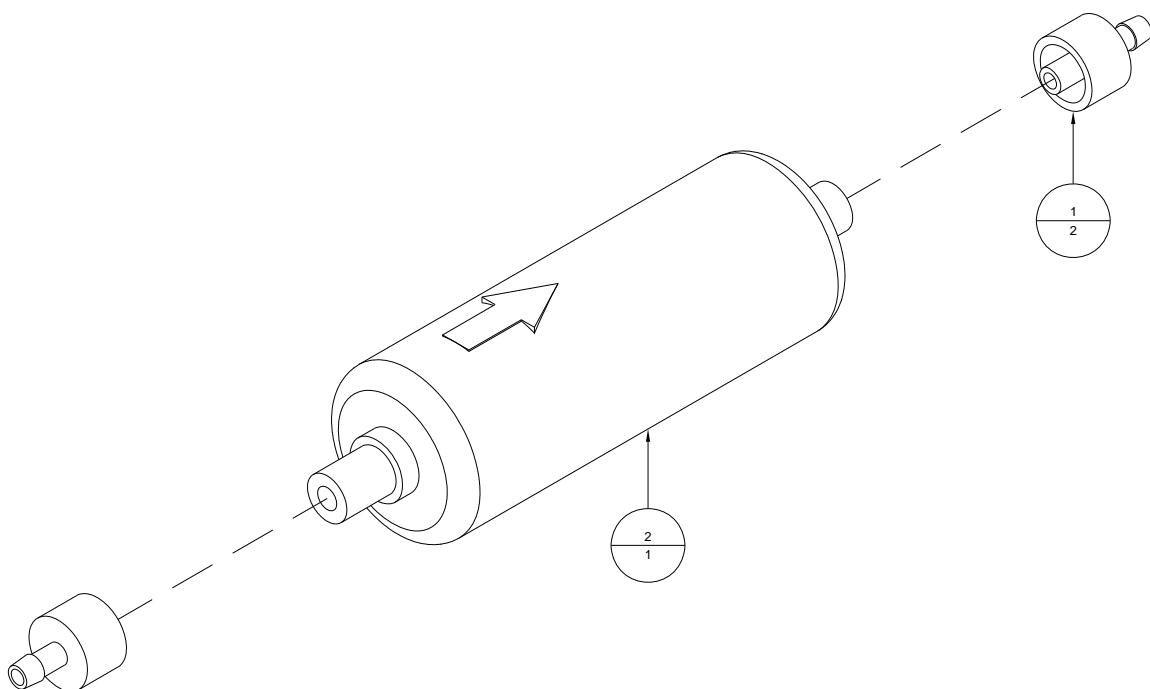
9103390A – Filter, Assembly, 10 μm
